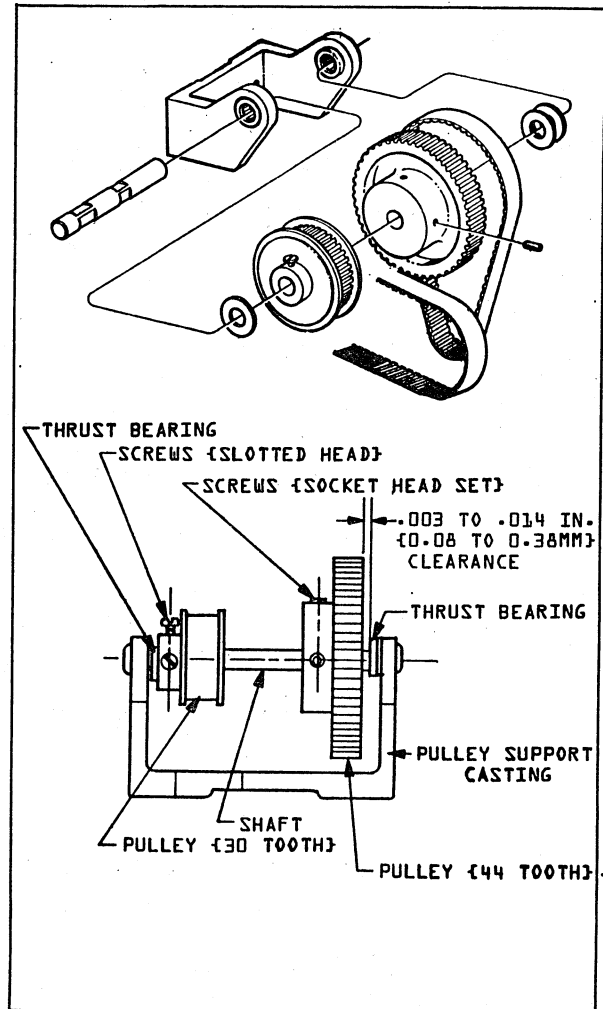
PULLEY ASSEMBLY-RIGHT HAND (DISASSEMBLY AND ASSEMBLY)
